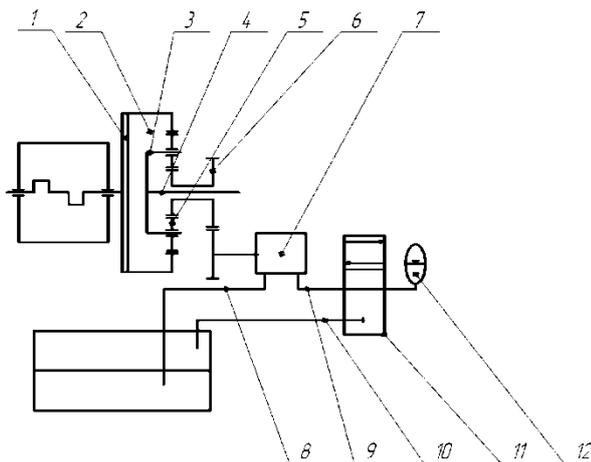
Planetary clutch: 1 - a flywheel; 2 - a ring gear; 3 - carrier; 4 - driven shaft; 5 - satellites; 6 - the sun gear; 7 - hydraulic pump; 8 - a suction main; 9 - discharge line; 10 - drain line; 11 - the distributor; 12 - the pneumo-hydraulic accumulator.
